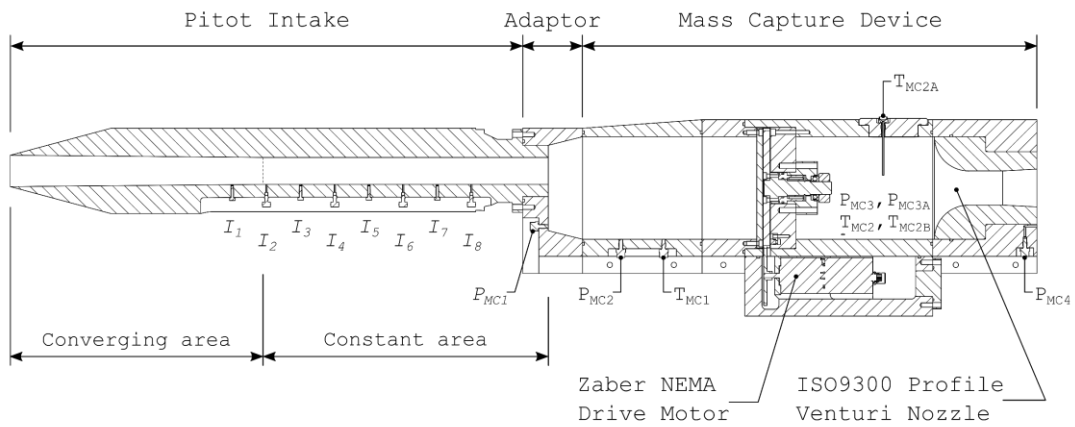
Cross-section through the mid-plane of the MassCap and Pitot Intake B assembly. For clarity, the associated mounting hardware is not shown.
